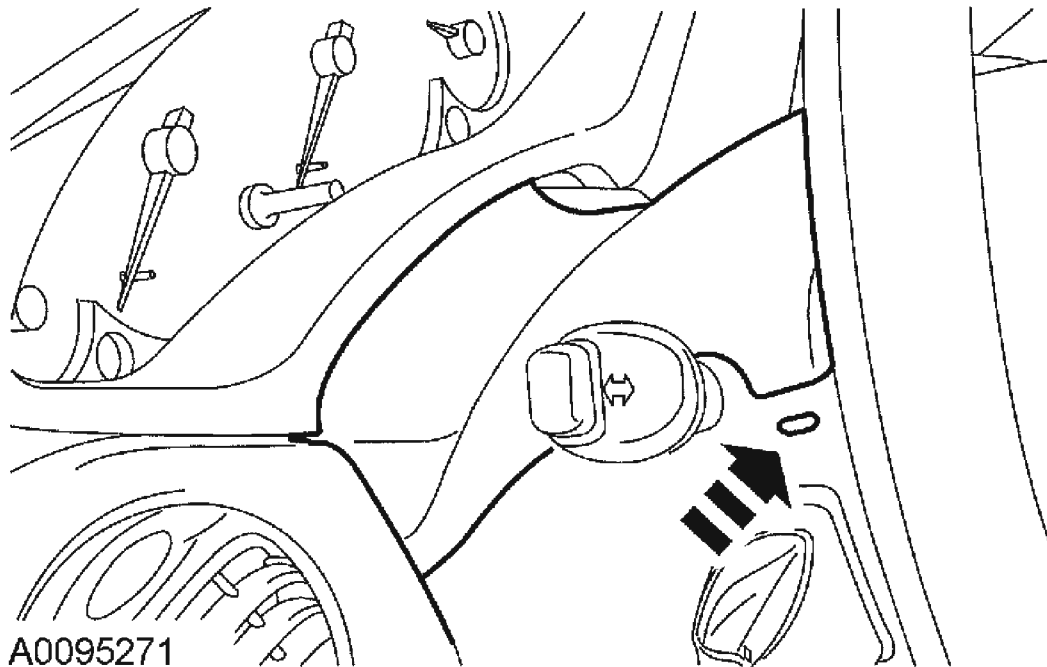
Removing Instrument Panel Lower Panel Bolts And Fastener
